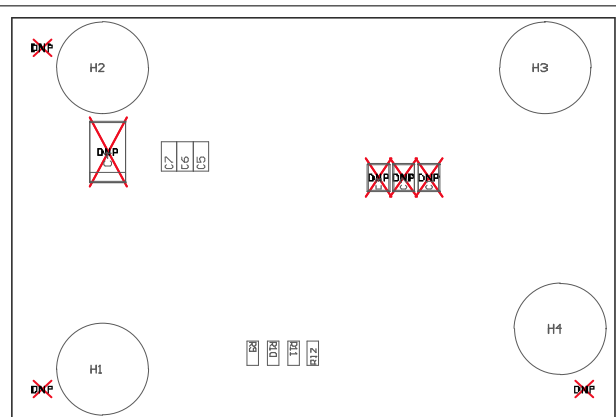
Bottom-Side Assembly (Viewed From Bottom)
